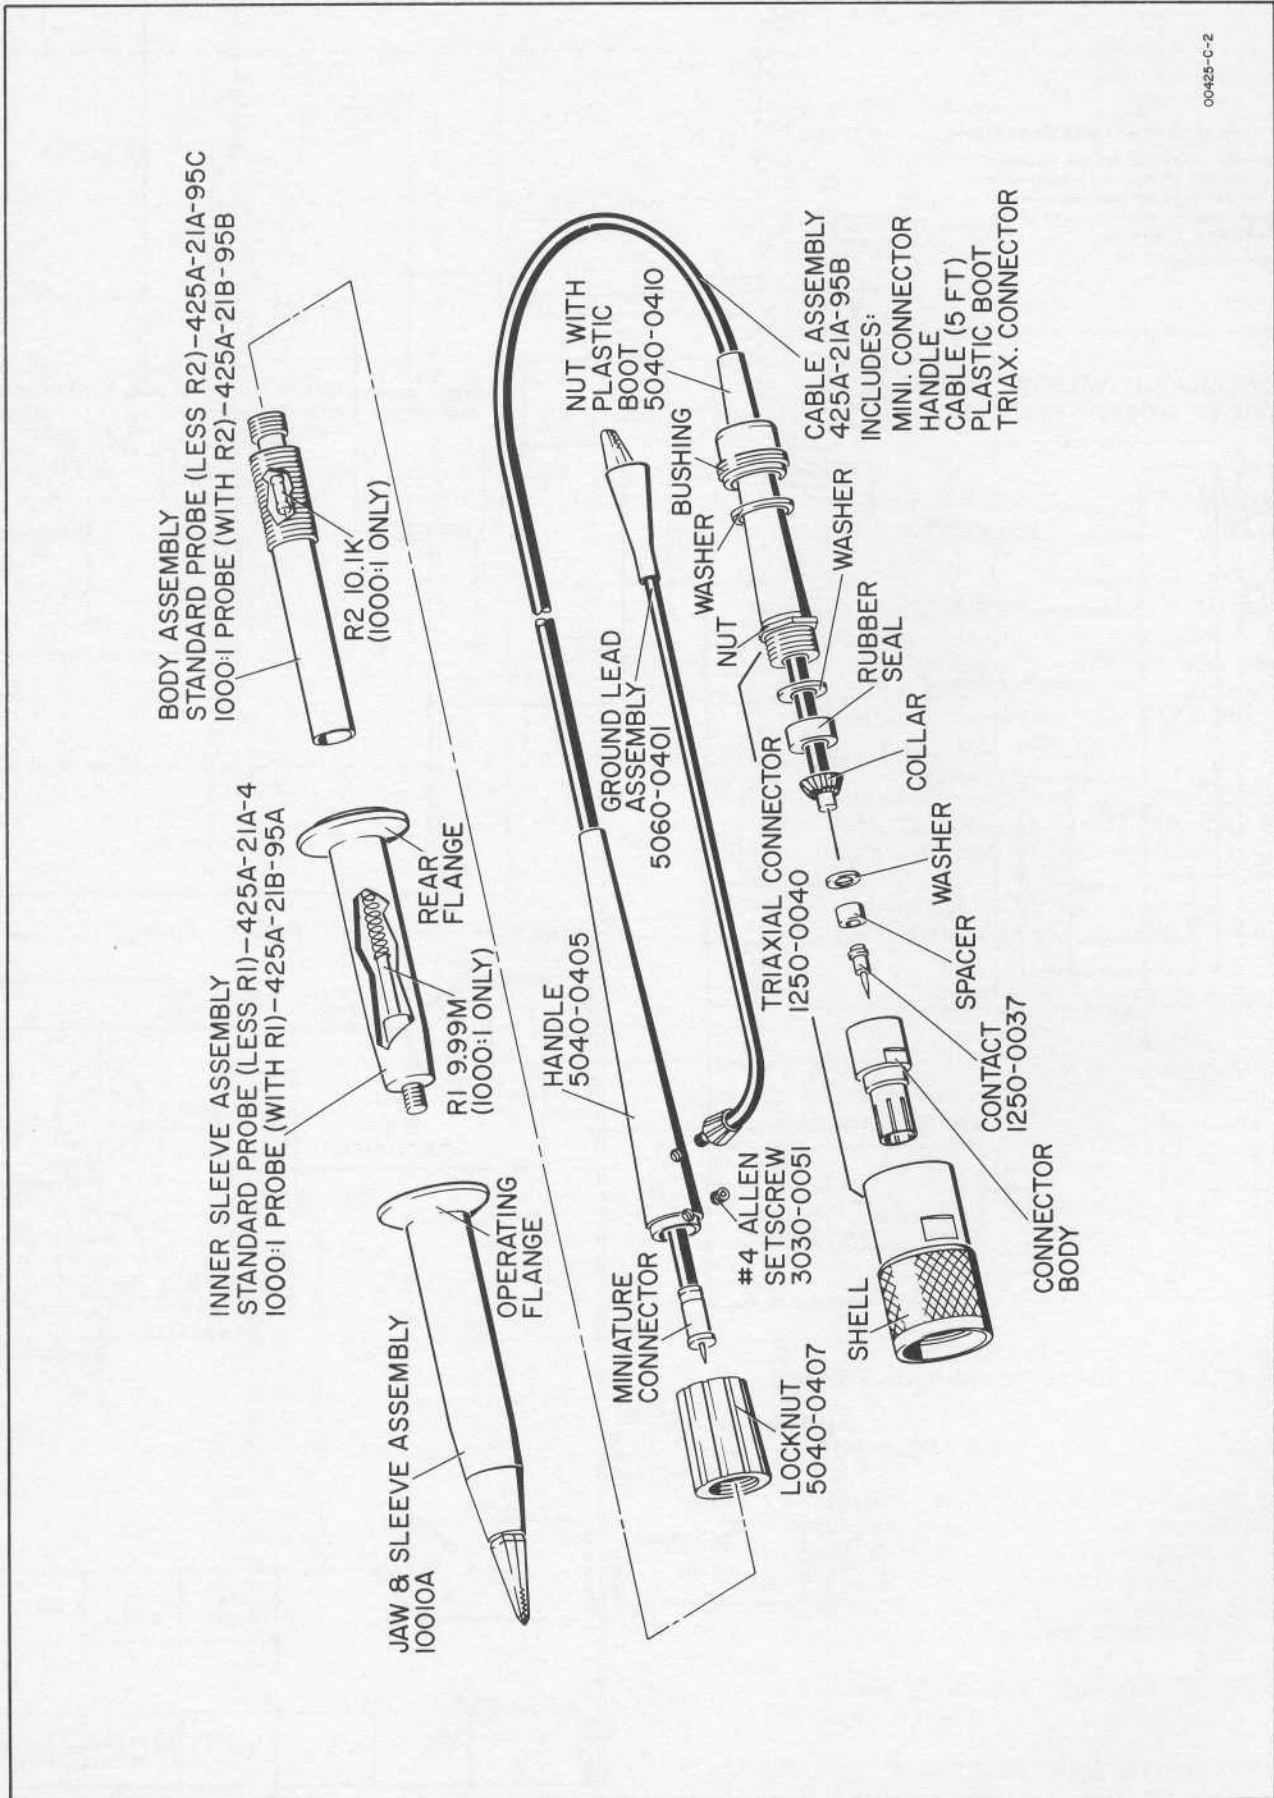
Exploded View of 425A-21A (Standard) and 11021A (1000:1 Divider) Probes
